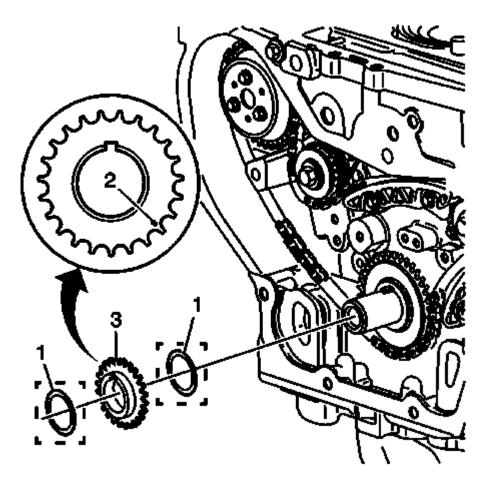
Friction Washer And Timing Chain Drive Sprocket Courtesy of GENERAL MOTORS COMPANY
